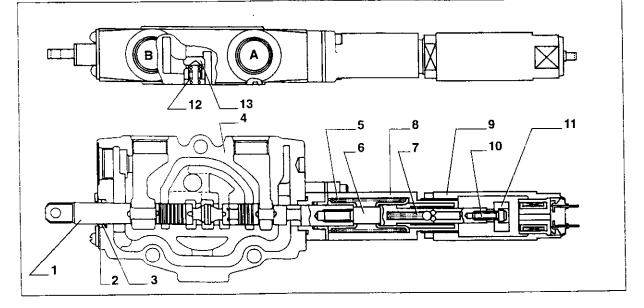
Configuration of "Booms" section of control valve (mechanical)
